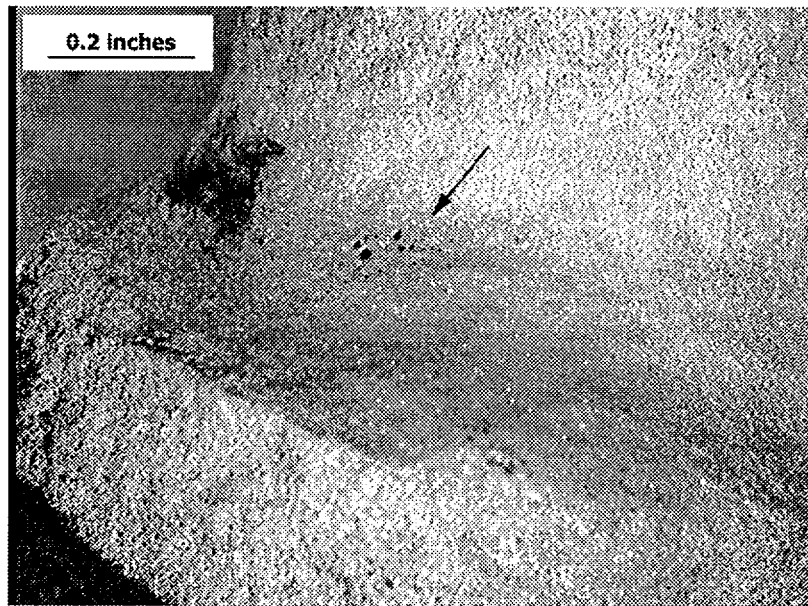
Photograph showing patch of porosity on outside surface, at pipe-side toe of socket weld.
